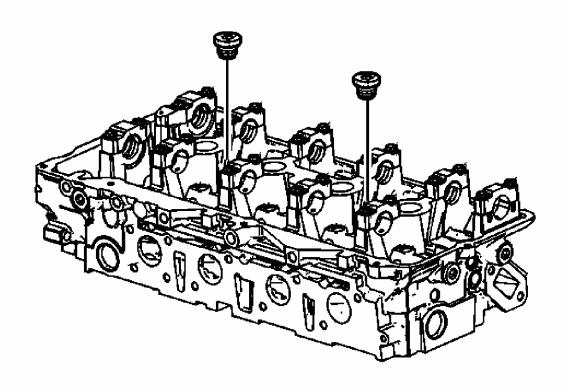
View of Threaded Coolant Plugs Courtesy of GENERAL MOTORS CORP.
